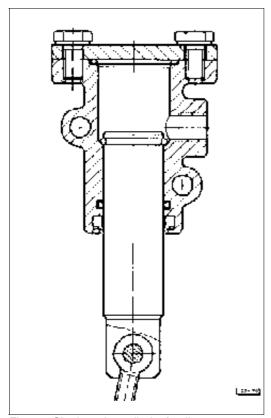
Single acting cylinder for disengagement of four wheel drive.
